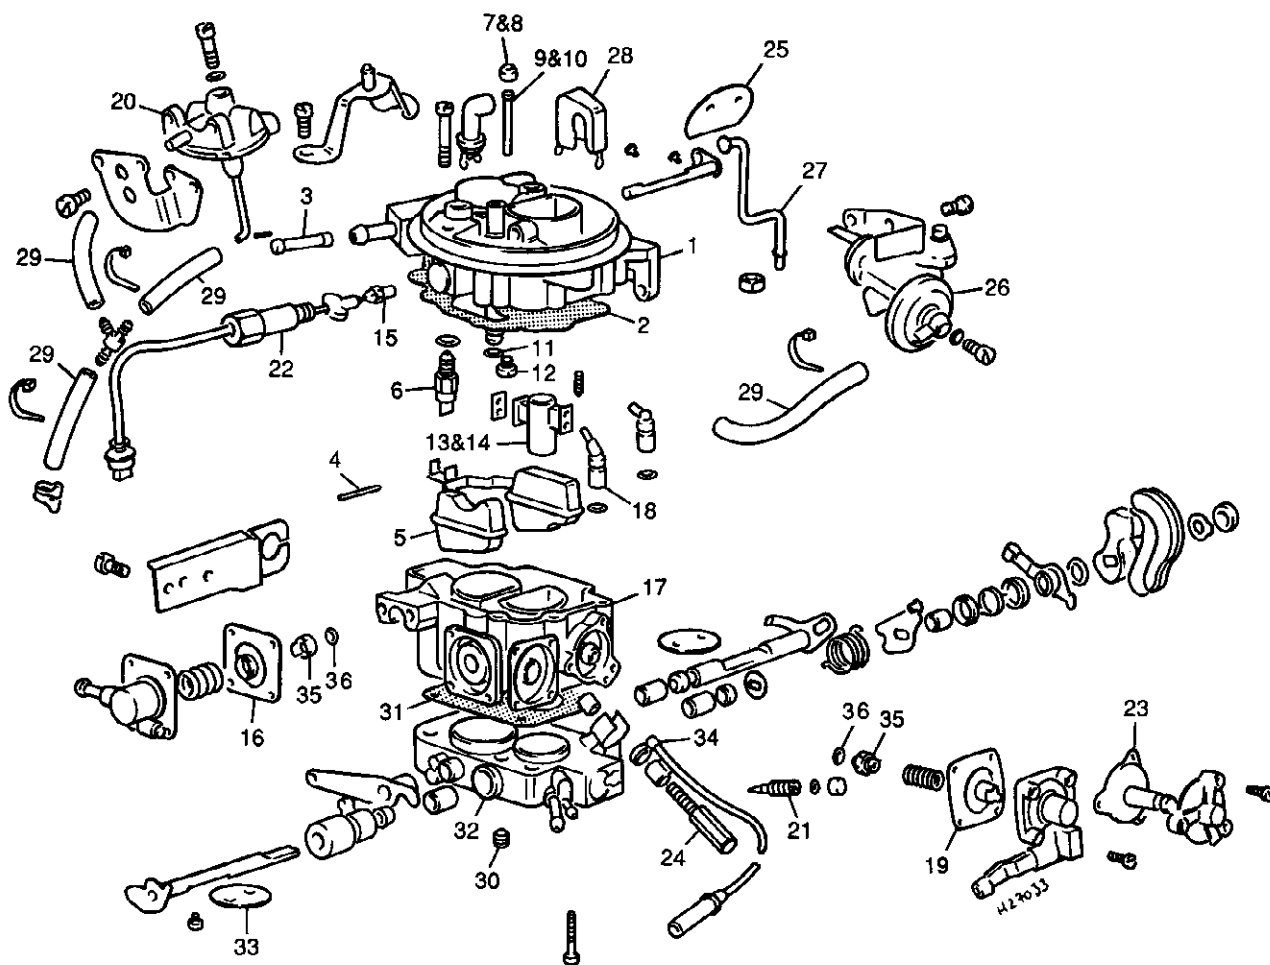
Exploded view of Weber TLDE (Sec 3)
